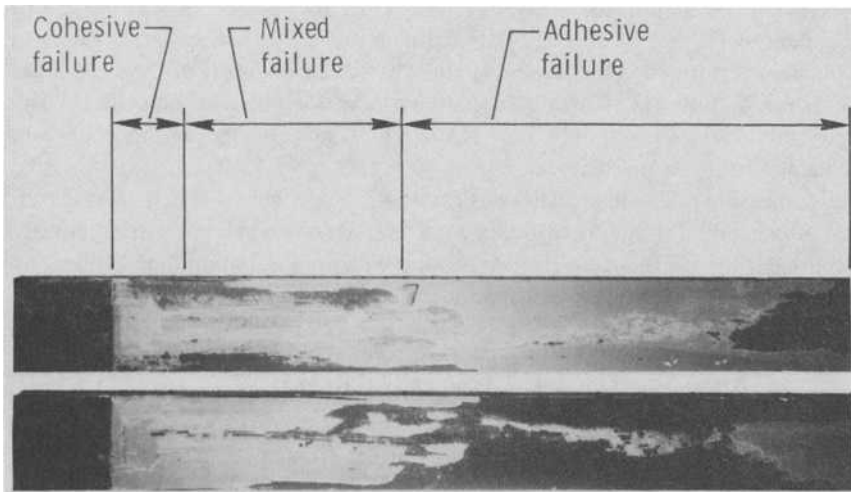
Debonded surfaces of DCB specimen with FM-300 adhesive.
